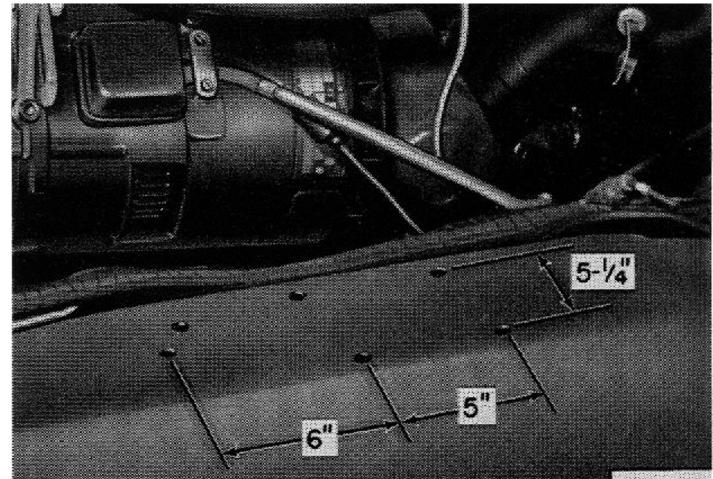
E4 REGULATOR MOUNTING HOLES LOCATION
